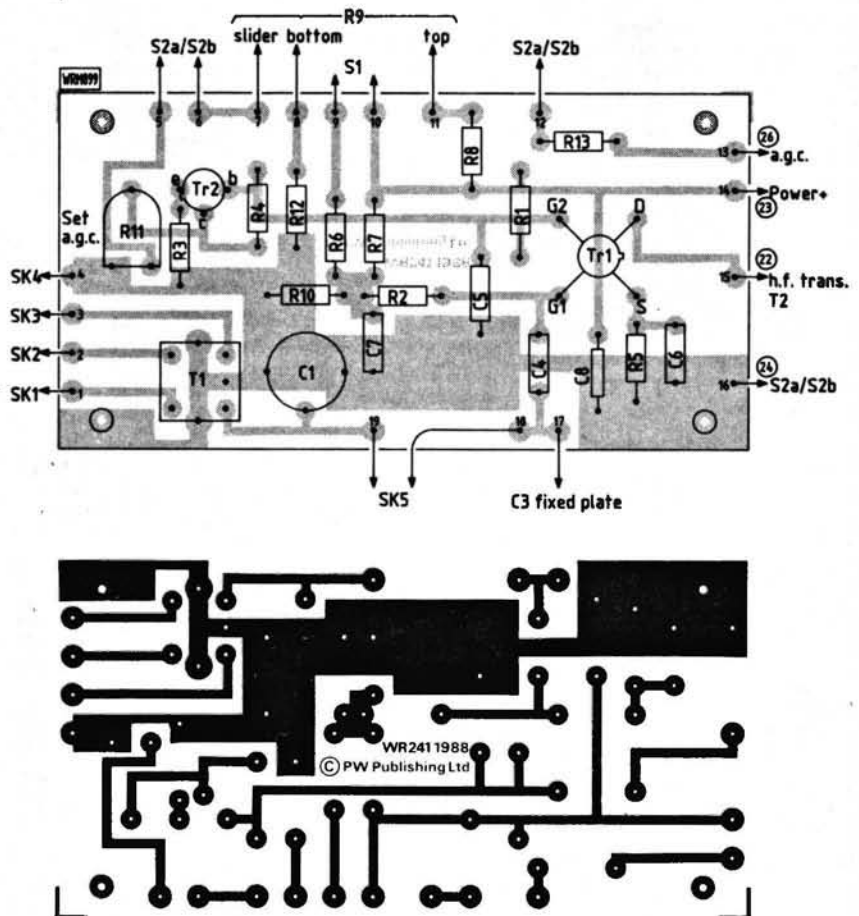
Single-sided track pattern (shown full size) and component overlay of r.f. stage p.c.b.
